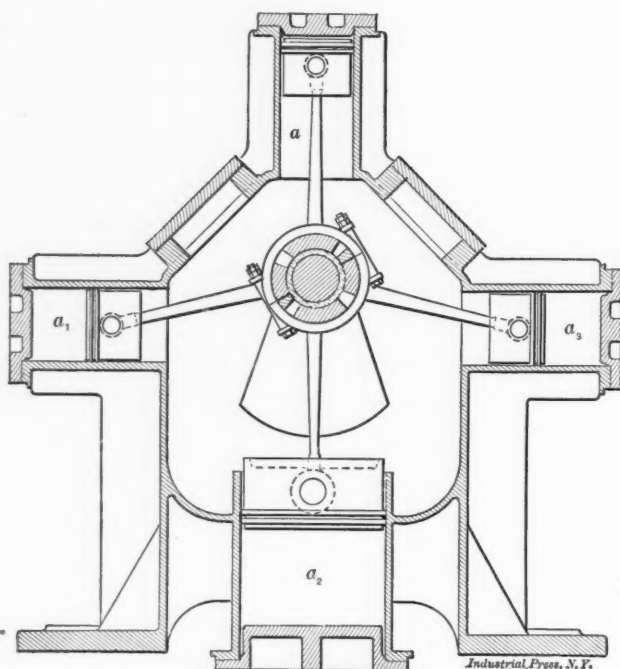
Cross-section of Multiple Expansion Steam Engine.
